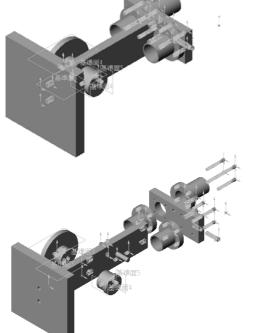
Design Phase: Three-dimensional Drawing (D) Using CAD Tools (SOLIDWORKS).
